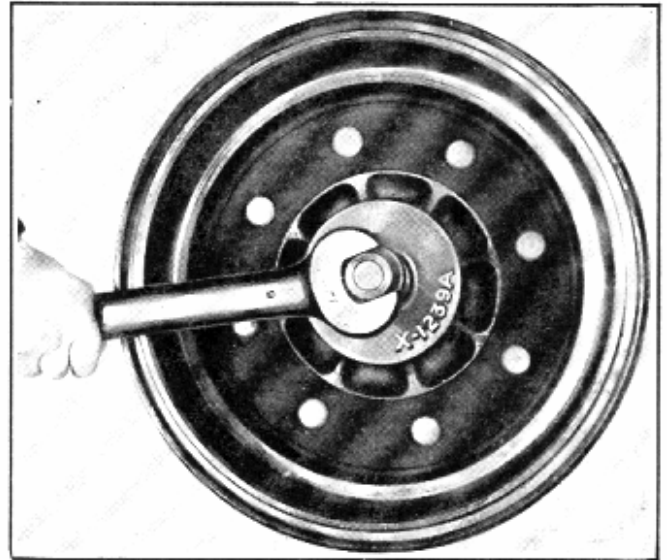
Using Tool X-1239-A to Remove the Inner Bearing, Grease Retainer and Oil Slinger
